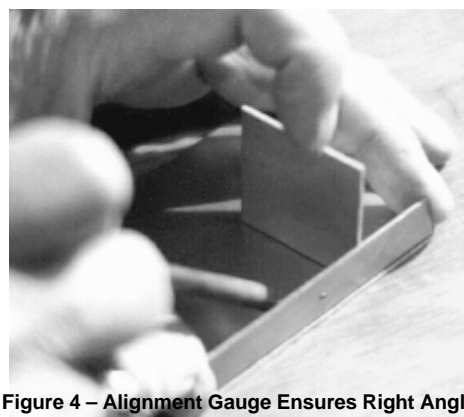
Alignment Gauge Ensures Right Angle Positioning
